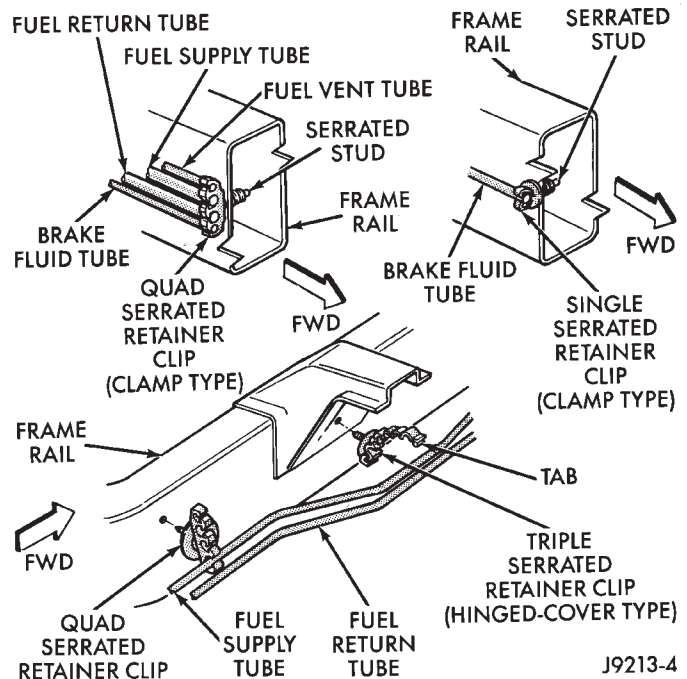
Fuel & Brake Tube Serrated Retainer Clips—Typical
